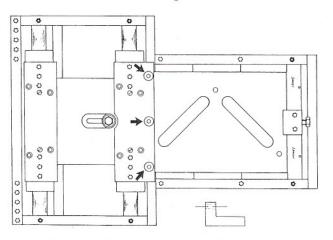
Figure III: Install 45° cam with three ¼-inch flat head screws to the guide spacer at ->> .
